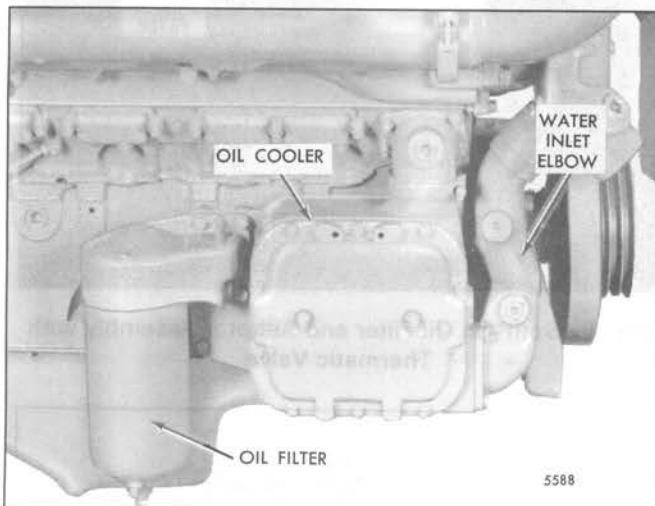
Typical Full-Flow Oil Filter Mounting (6V or 8V Engine)
